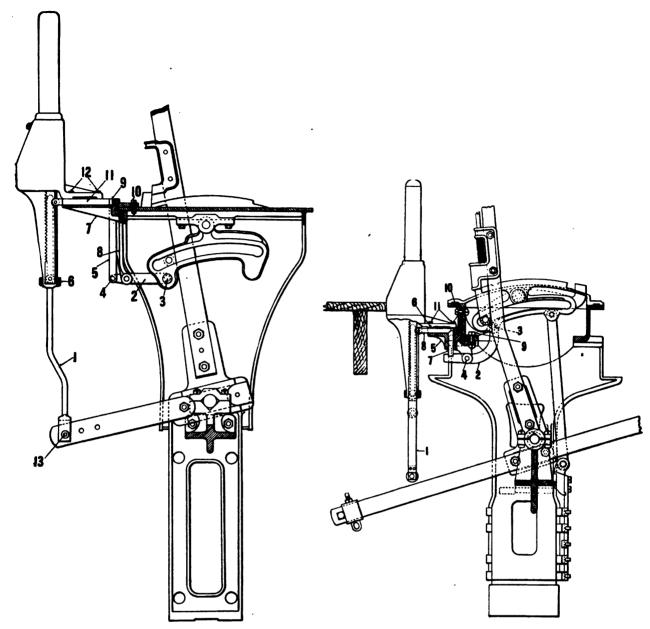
Mechanical Time Lock Applied to a National Interlocking Machine. The Union Switch & Signal Company.
